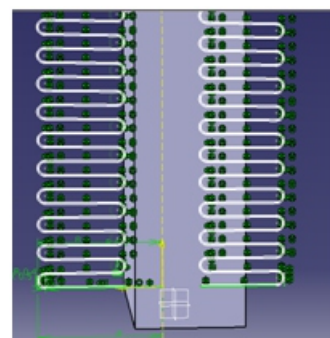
Part drawing of the Serpentine coil in radiator core
